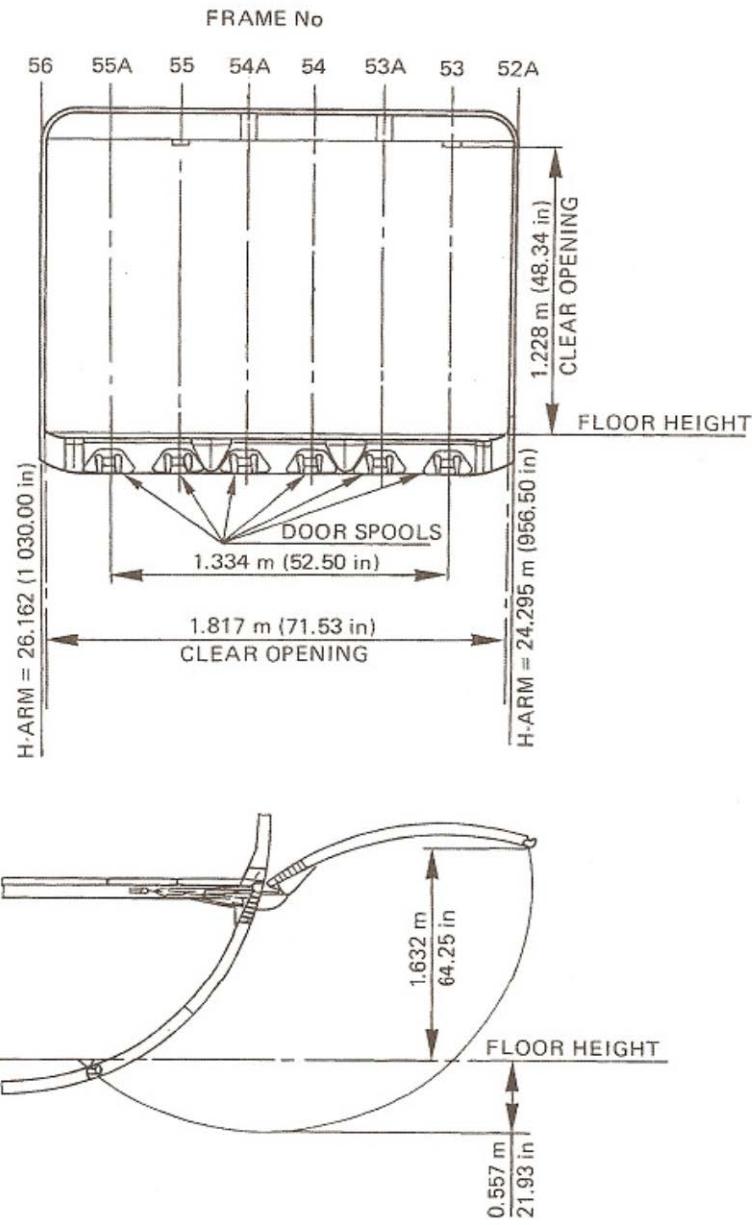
Airbus A320 – Aft Hold Lay out and Dimensions
